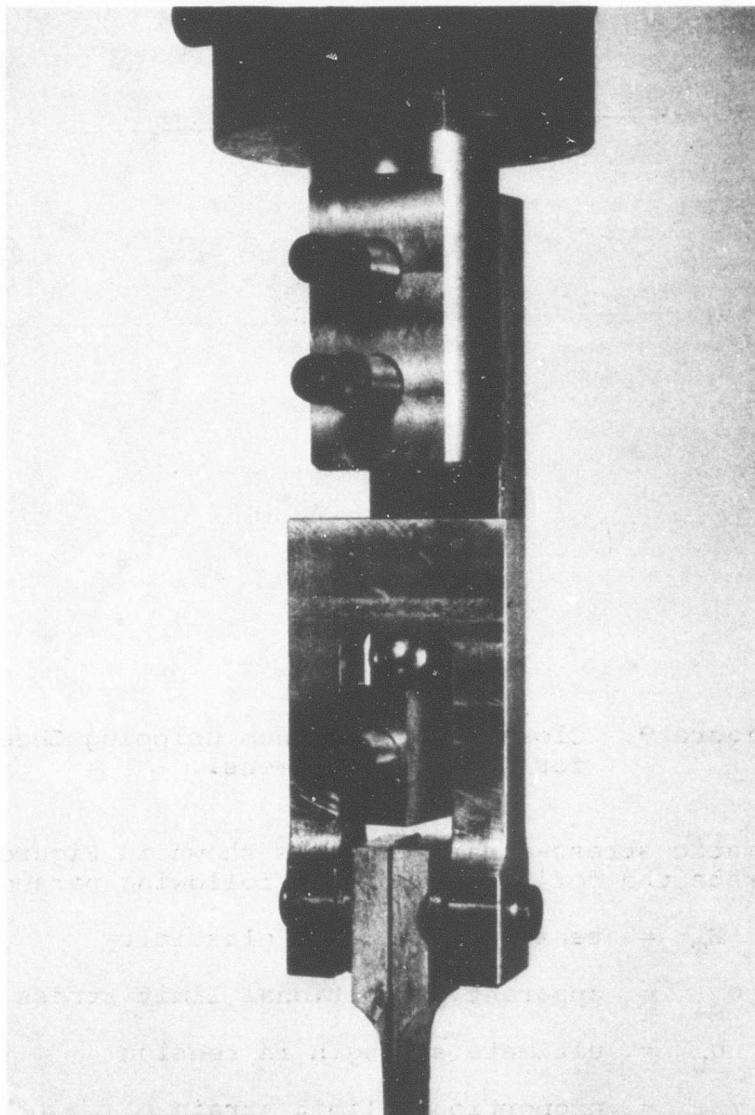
Exploded Close-Up of Ball Bearing Swivel Shackle.
